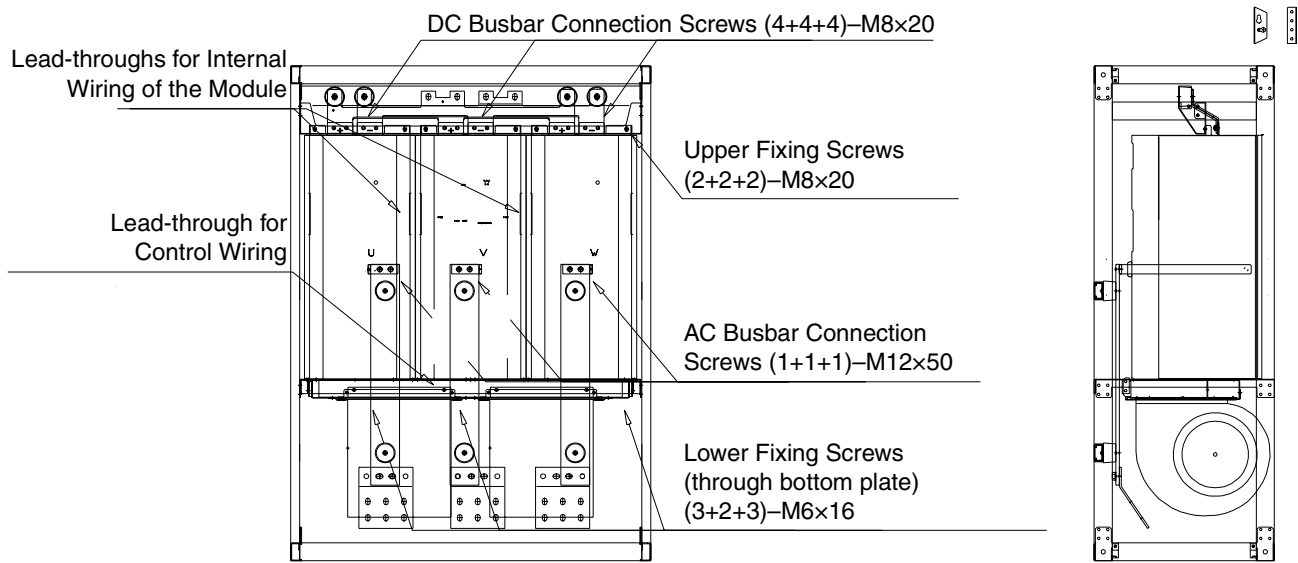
Installing R10i/R11i phase modules in the mounting frame.
